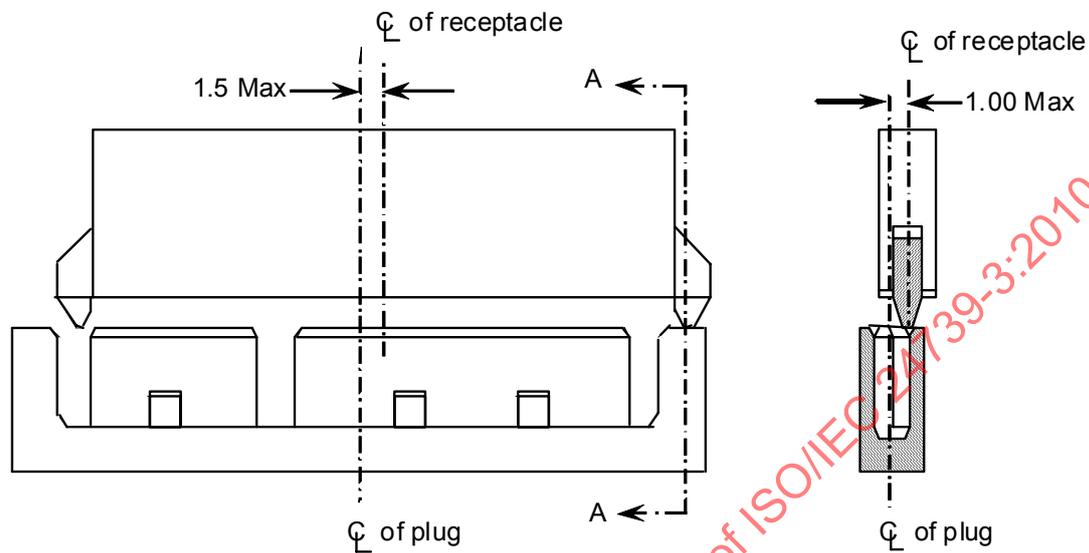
Connector pair blind-mate misalignment tolerance
